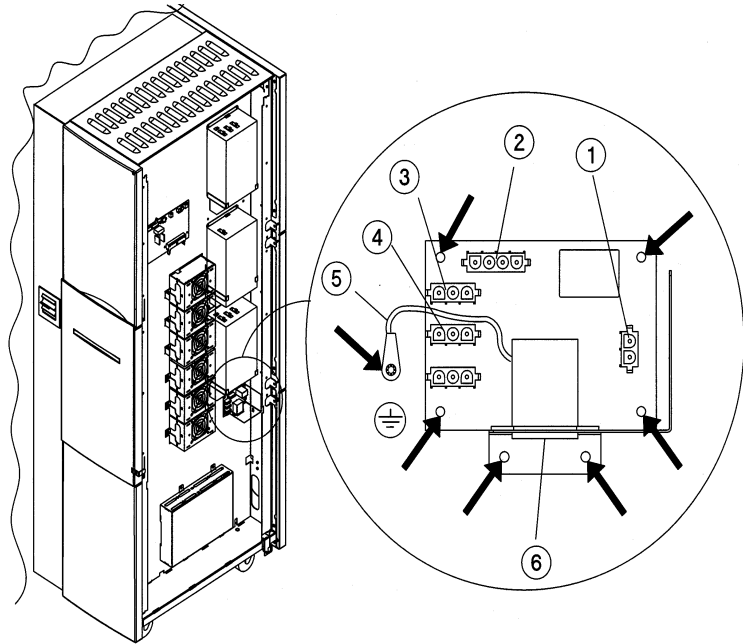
Controller PCA Cables and Mounting Screws
